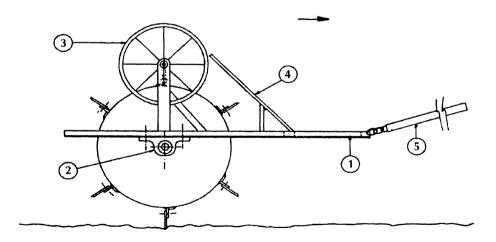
Lateral view of the knife-roller Queixada/IAPAR. 1) chassis; 2) ball bearings; 3) transport wheel; 4) protection structure; 5) shaft.
